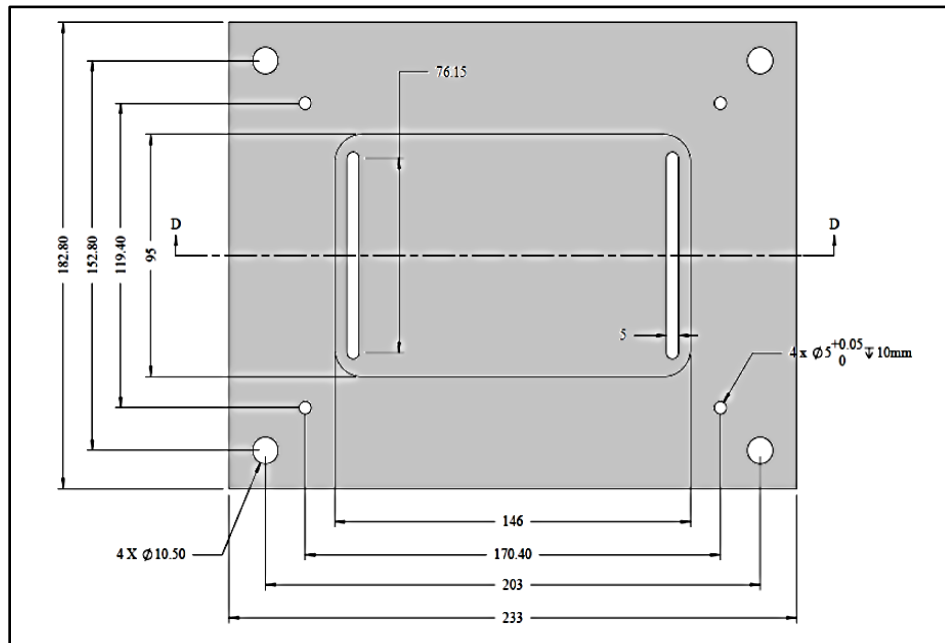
The DCMD module plate dimensions from the outside in millimeters [144].
